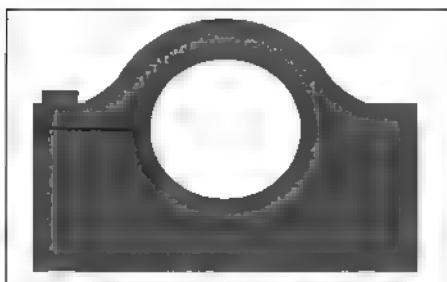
A simple bearing split only on one side, with a bolt on the open side to close the bearing on that side.
